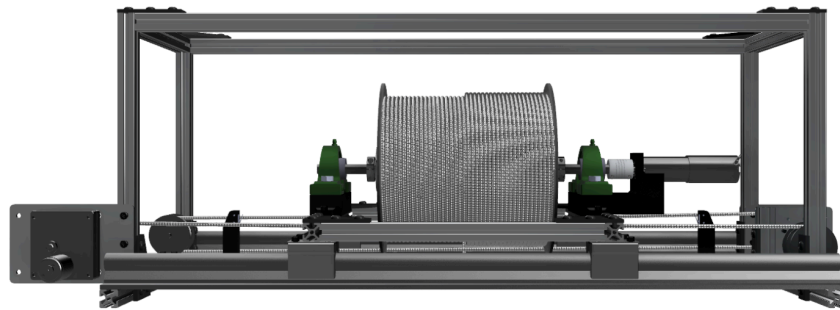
CAD model of assembly, including cables and motor/encoder mounts
